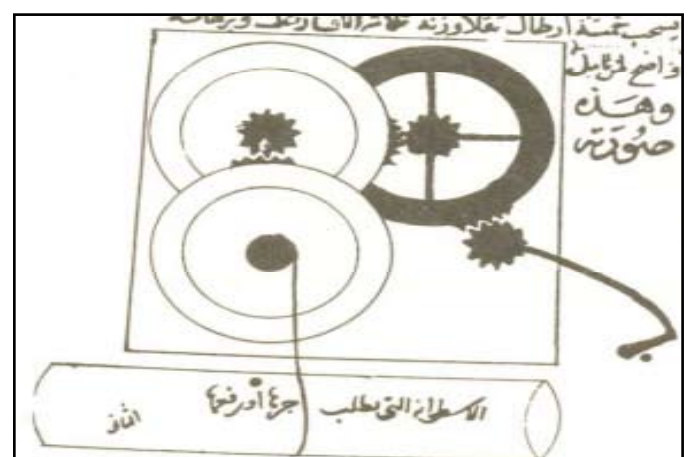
Taqi Al-Din compound gear train based crane [39].
